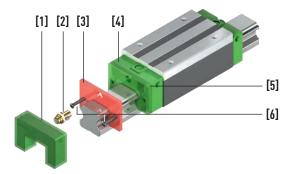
Exploded view of self-lubricating E2 block for the HG, EG and RG series
